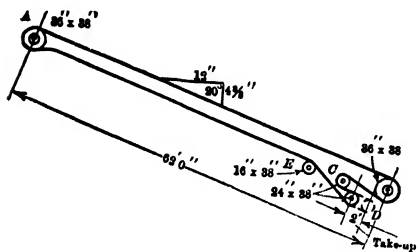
Conveyor with Deflector Pulleys too Small in Diameter.
